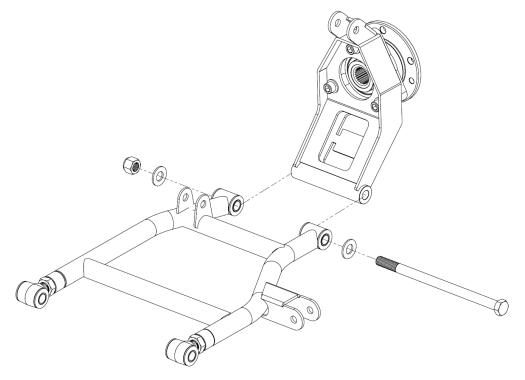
Assemble the upright to the lower arm using the 5/8 X 10-1/2" bolt and harware.
